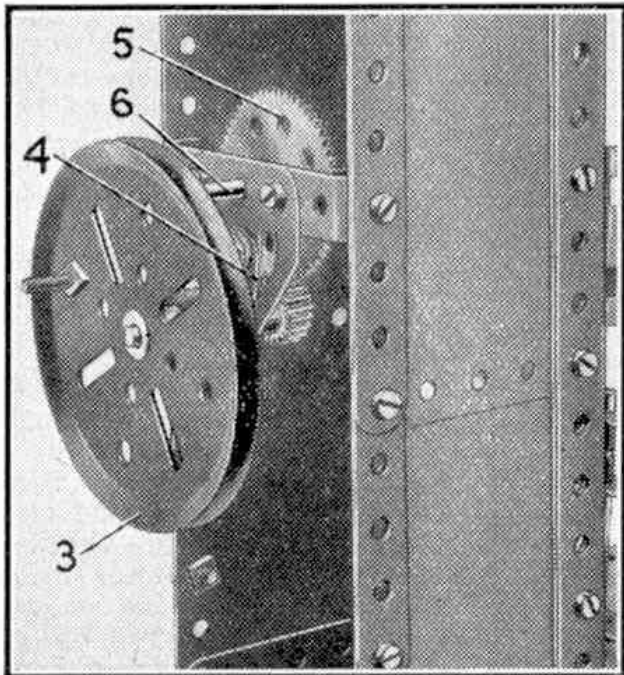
A rear view of the perforating machine showing the driving arrangement.
